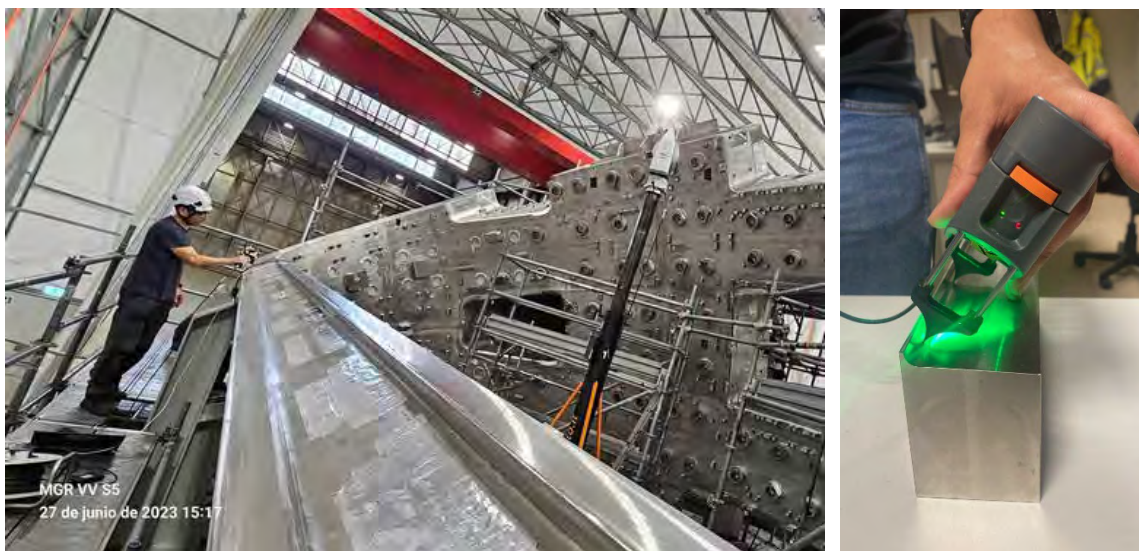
Geometrical Reconstruction of the VV sector bevel.
